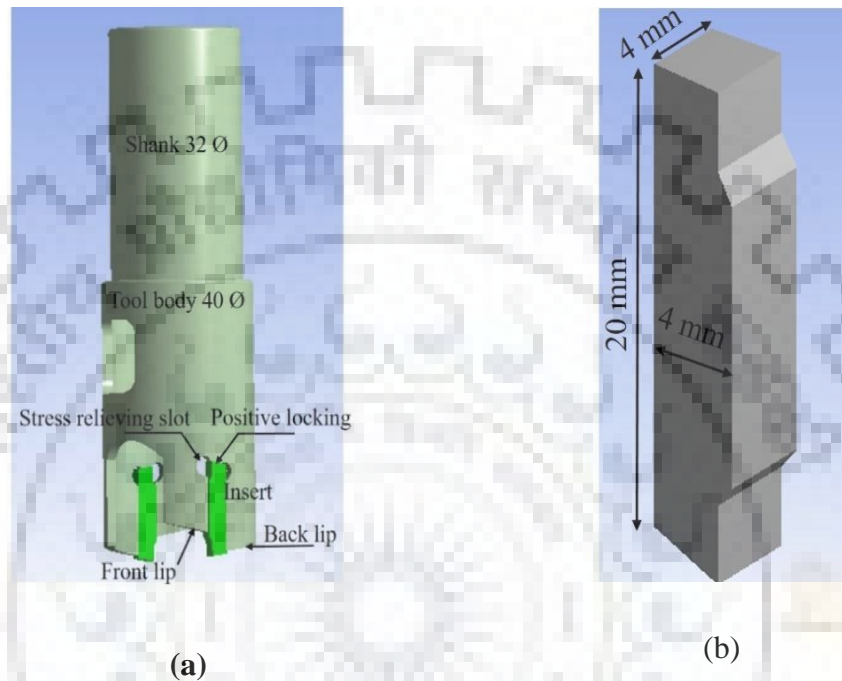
(a) CAD model of trepanning tool with two inserts (b) CAD model of insert
